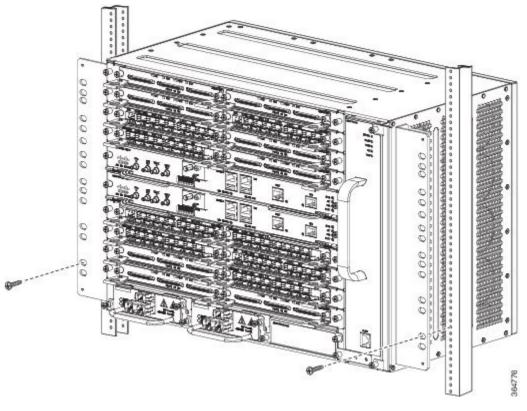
Installing the Chassis in a 300 mm ETSI Cabinet
